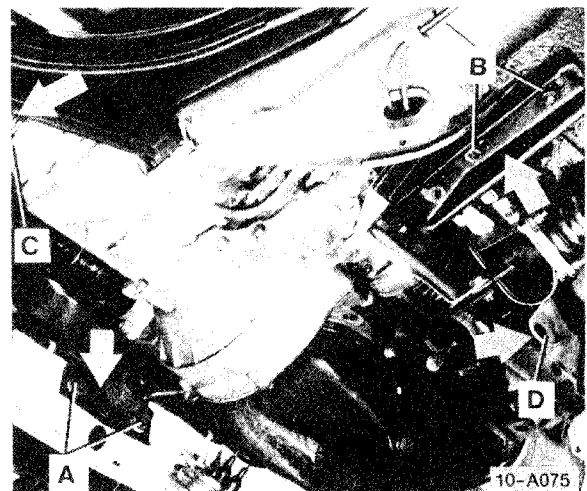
Bolts and nuts to be loosened when aligning engine and transaxle. Loosen front mount bolts at A, rear mount nuts at B, left mount center bolt at C, and right mount center bolt at D.
